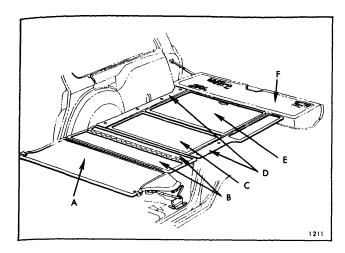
Folding Seat and Rear Compartment Floor Panels "A–55" Style Station Wagon
